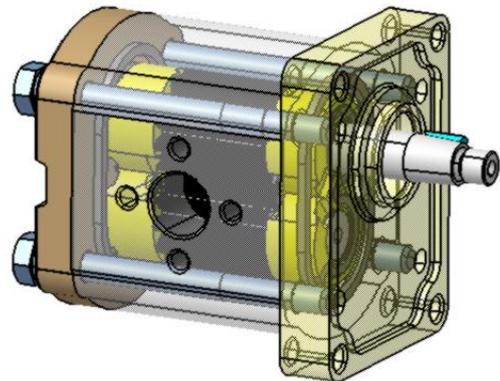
Pump assembly for $V_g=26 \text{ cm}^3/\text{rev}$
